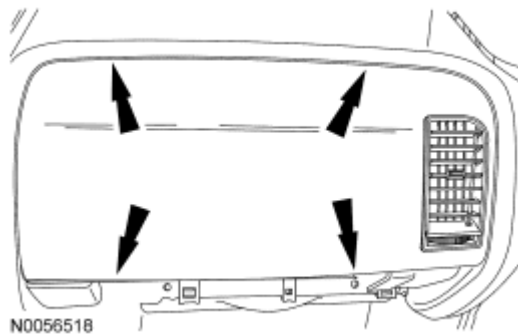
Locating Retaining Clips On RH I/P Finish Panel
